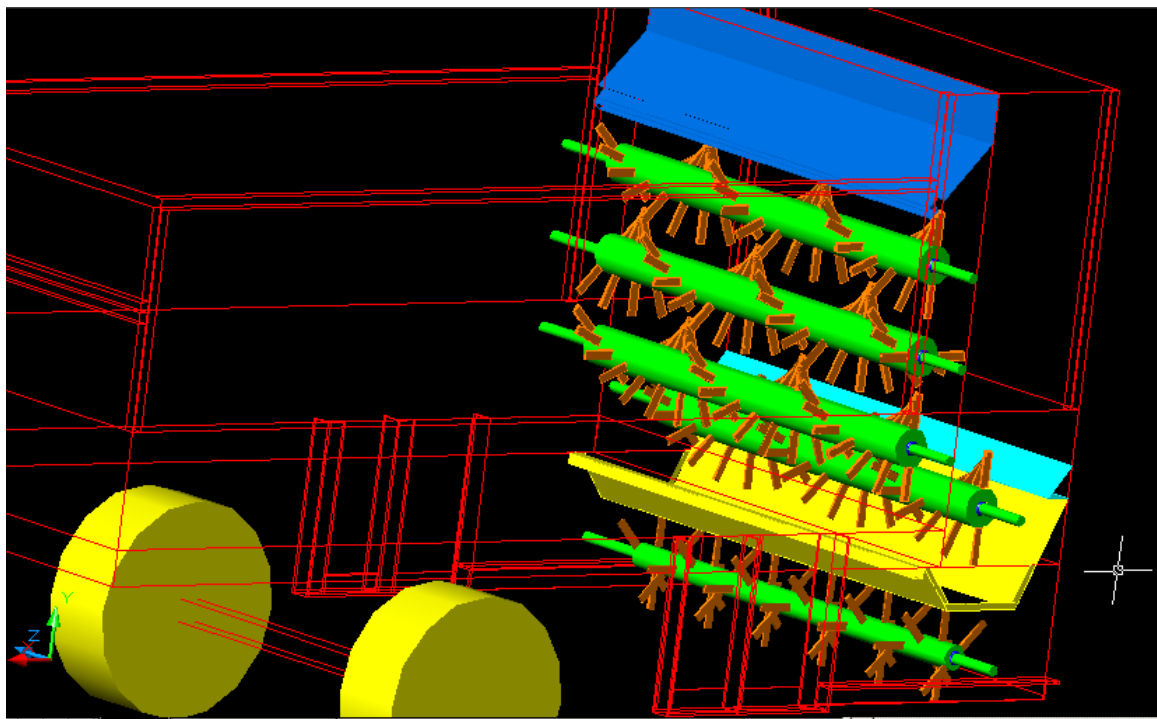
3-D AutoCAD Drawing of “Super Gray” Modifications
